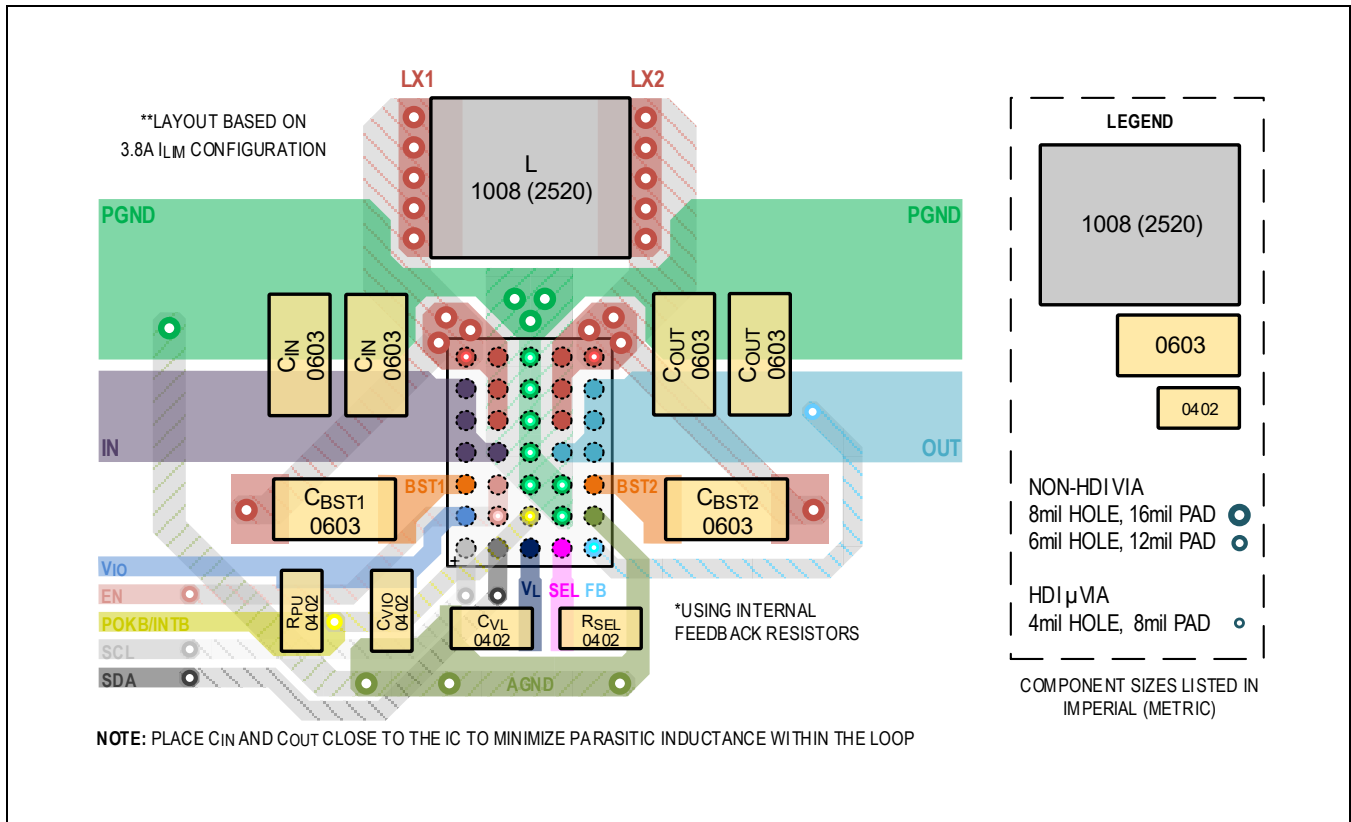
HDI PCB Layout Recommendation for 35 WLP Package with POKB/INTB and 2520 Inductor
